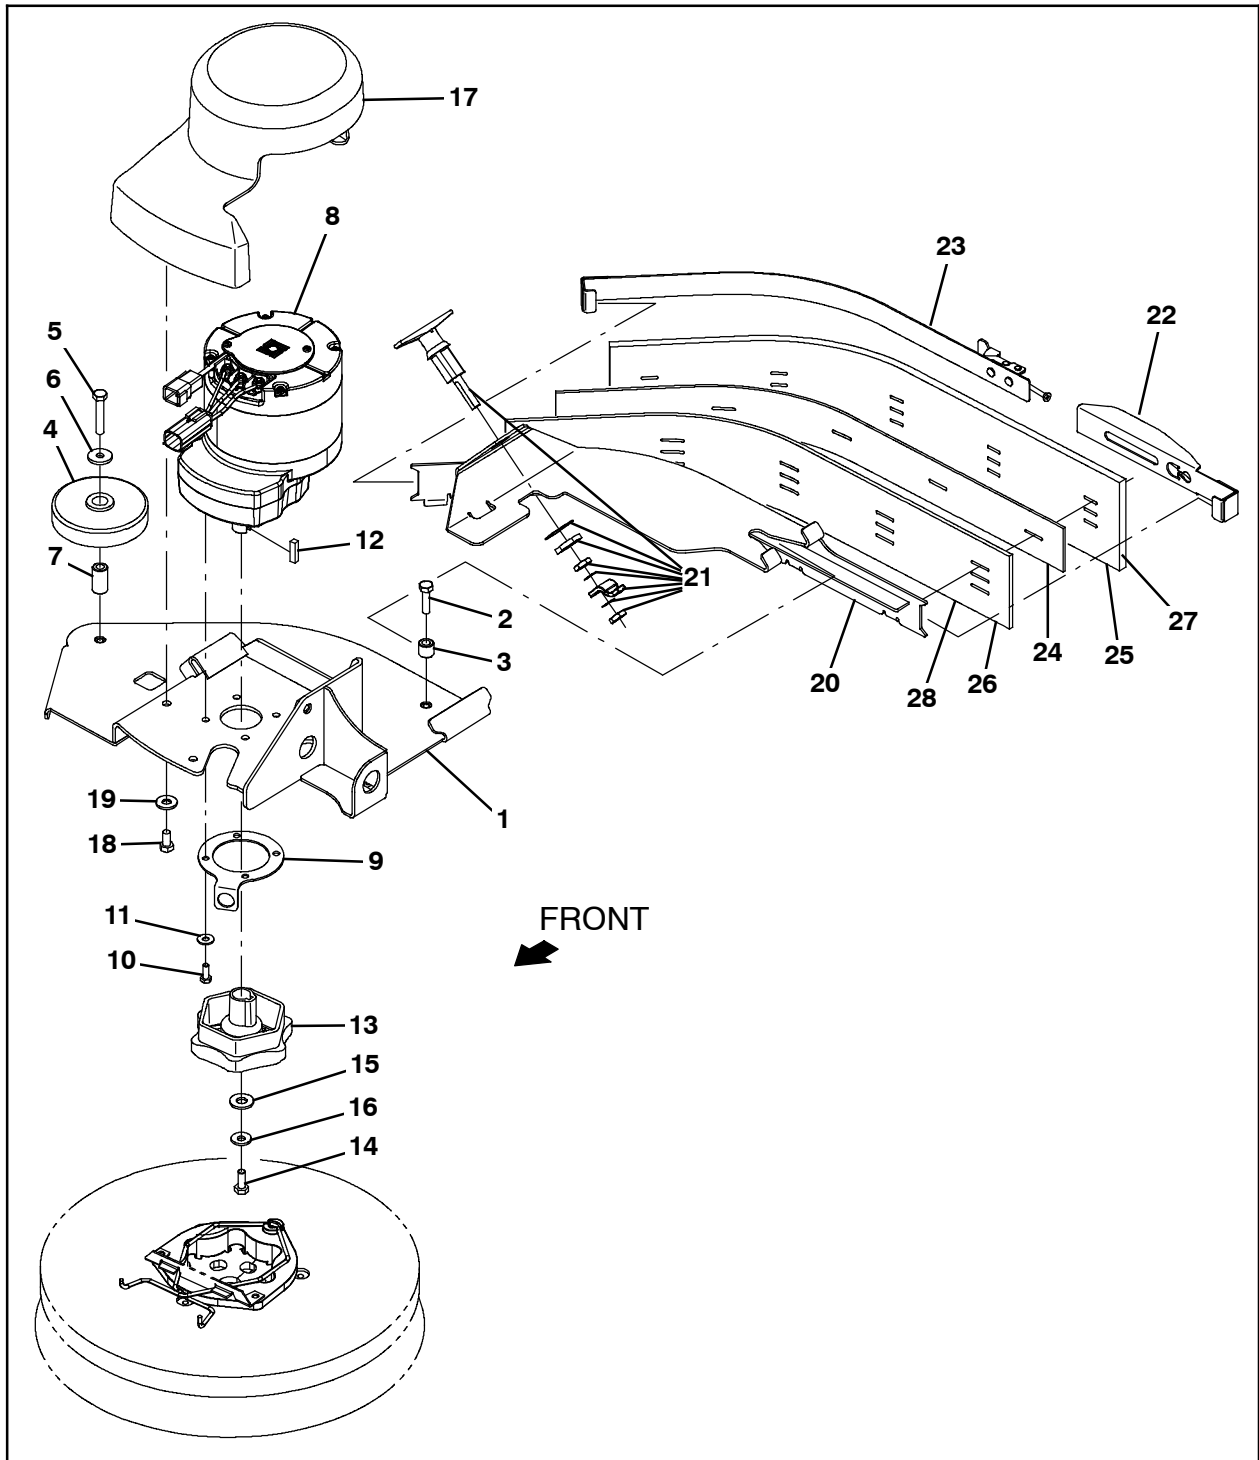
Scrubbing Side Brush Motor and Squeegee Group
